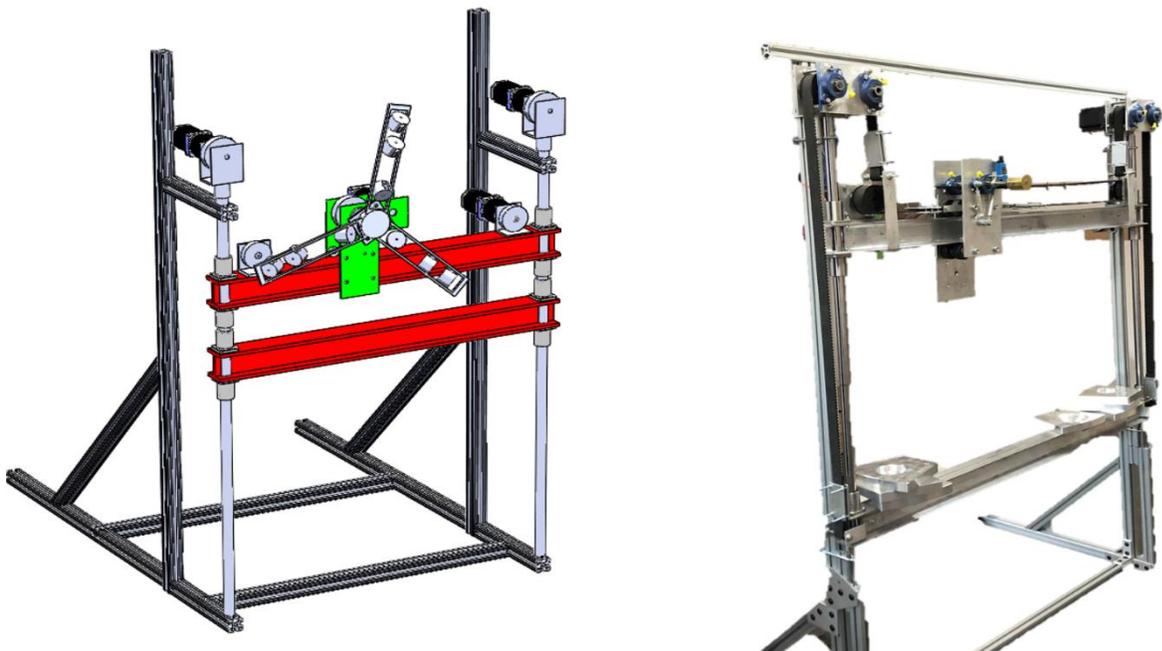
(Left) CAD assembly model of the mechanical design. (Right) Finished design of mechanical assembly
